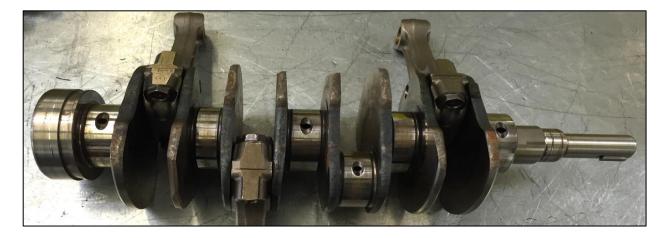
Crankshaft with piston rods of Subaru EJ 25
